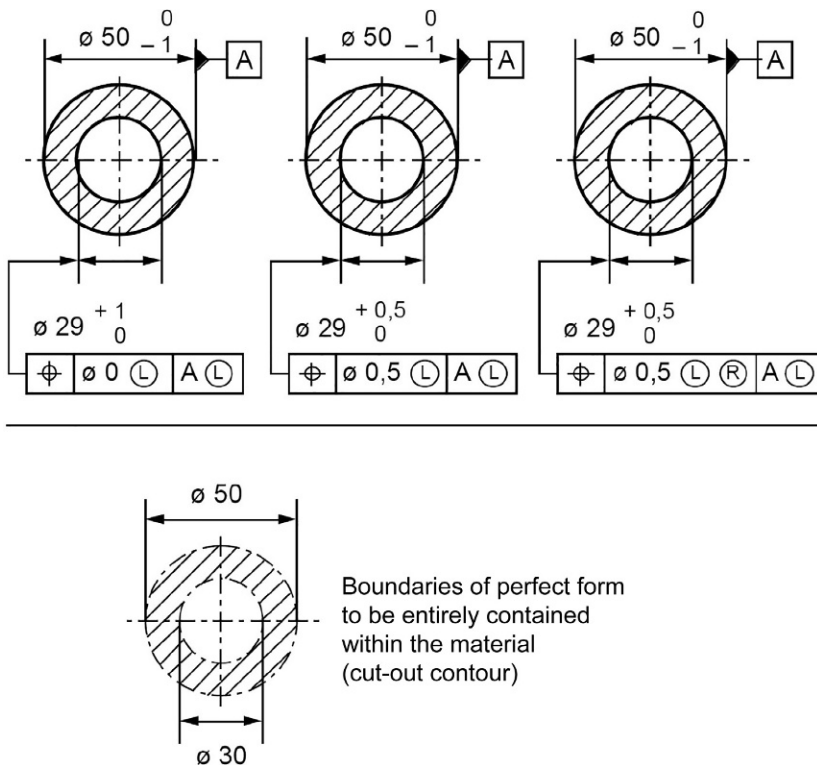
Least material requirement (Ⓛ after geometrical tolerance and after datum letter) and reciprocity requirement (Ⓡ after Ⓛ after geometrical tolerance)
